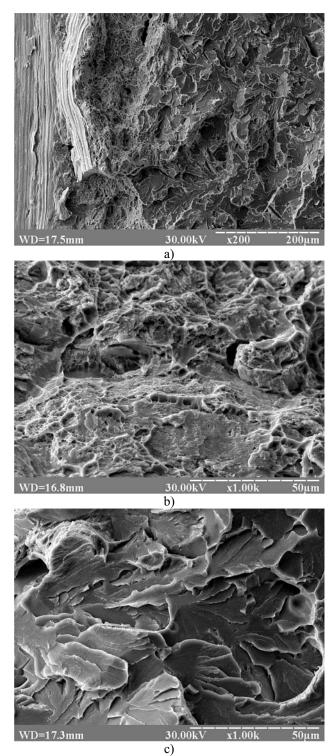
Fracture surface of Charpy specimen (a) and areas of ductile fracture (b) and cleavage (c) Slika 5. Površina loma Charpyevog uzorka (a) i područje duktilnog loma (b) i rascjepa (c)
